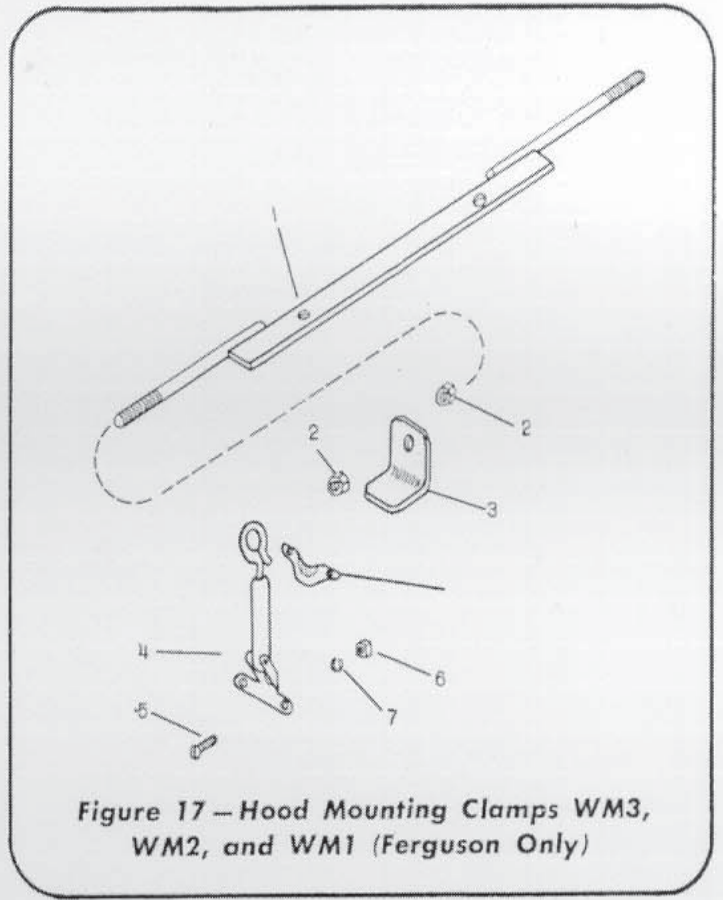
Hood Mounting Clamps WM3, WM2, and WM1 (Ferguson Only)
